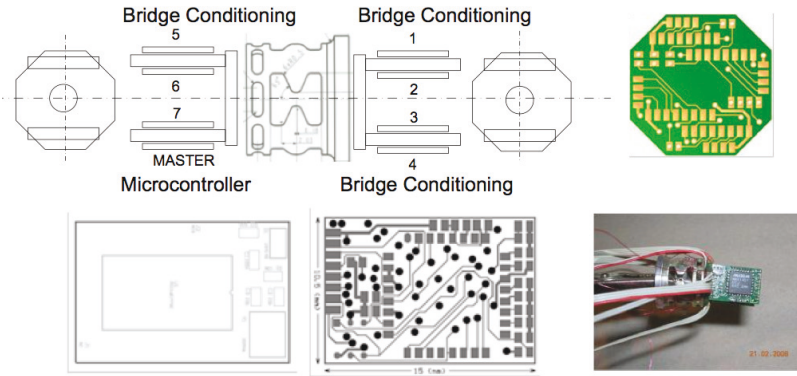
Final assembly of the electronic boards with dimensions about 10.5 mm x 15 mm.
